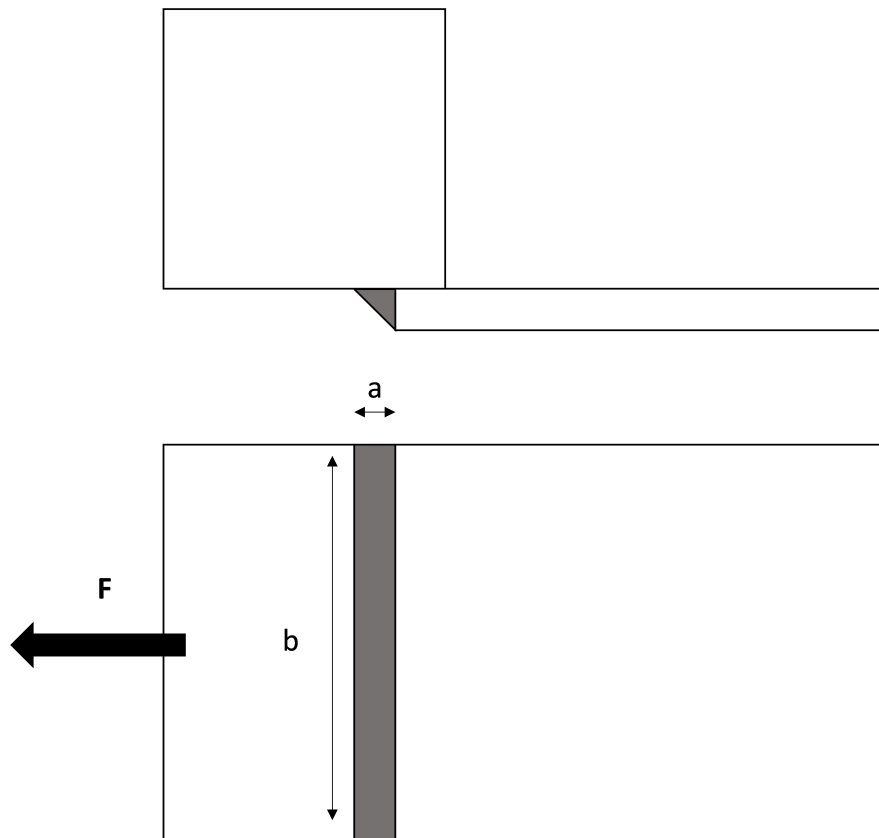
Geometry of the initially calculated TIG weld
